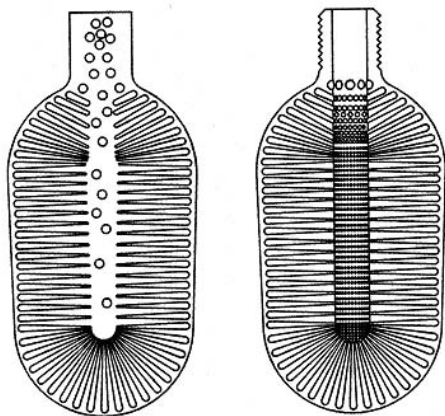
Schematic inner structure changing of the radial gasar casting after machining: left – initial structure, right – after machining.
